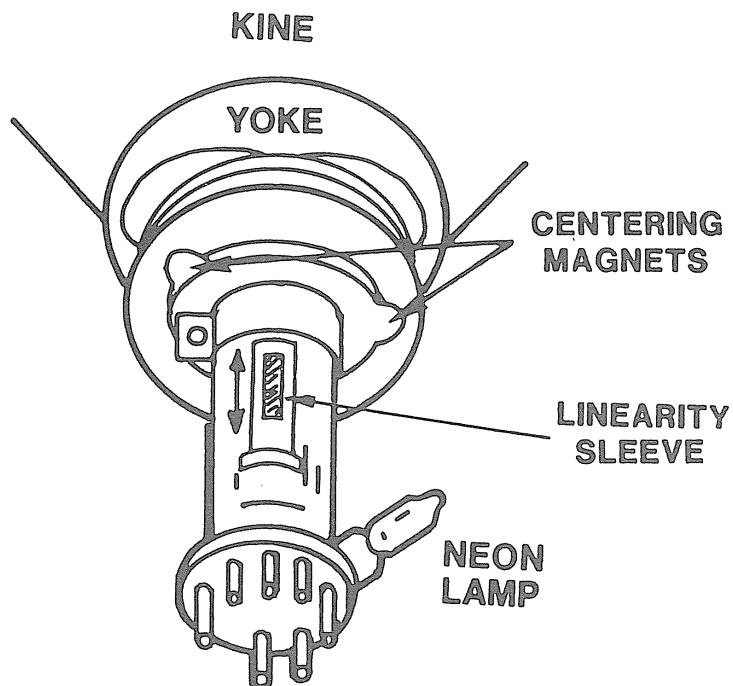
DEFLECTION YOKE ASSEMBLY
